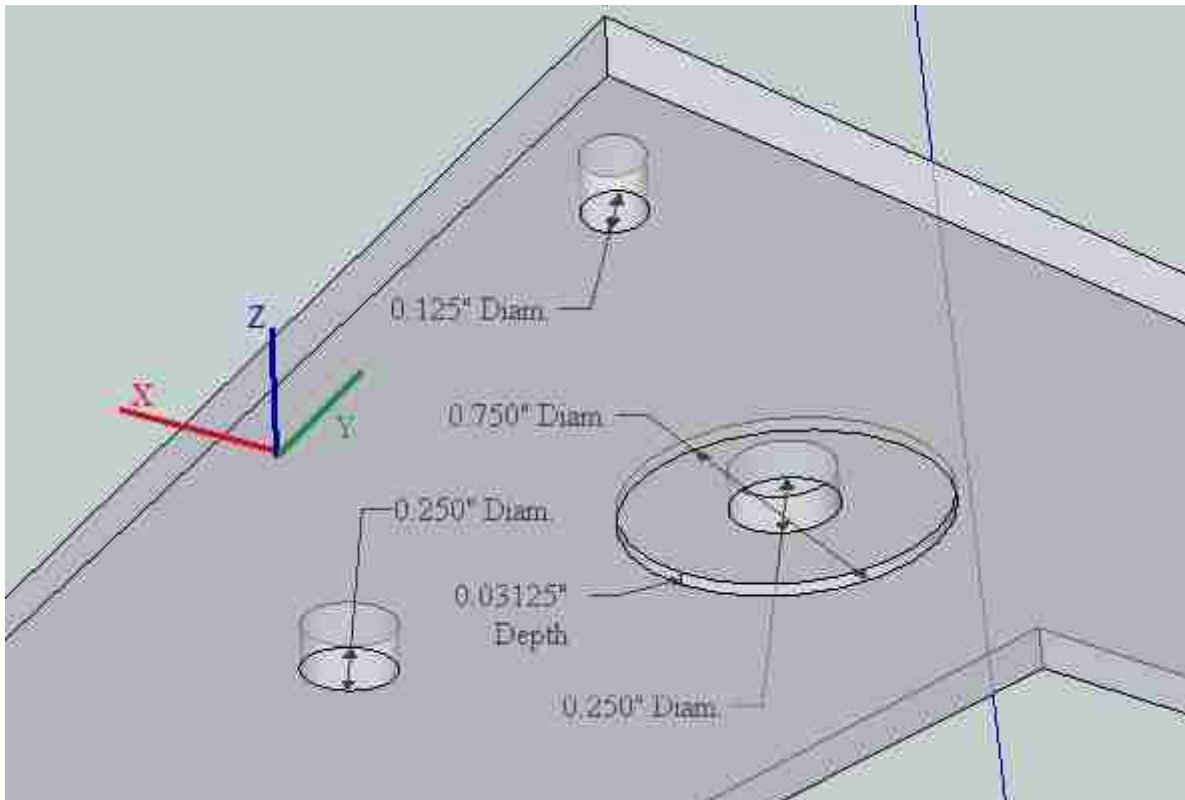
Orthogonal view of the 20x20 cm² upper trimmer aluminum plate illustrating hole dimensions.
